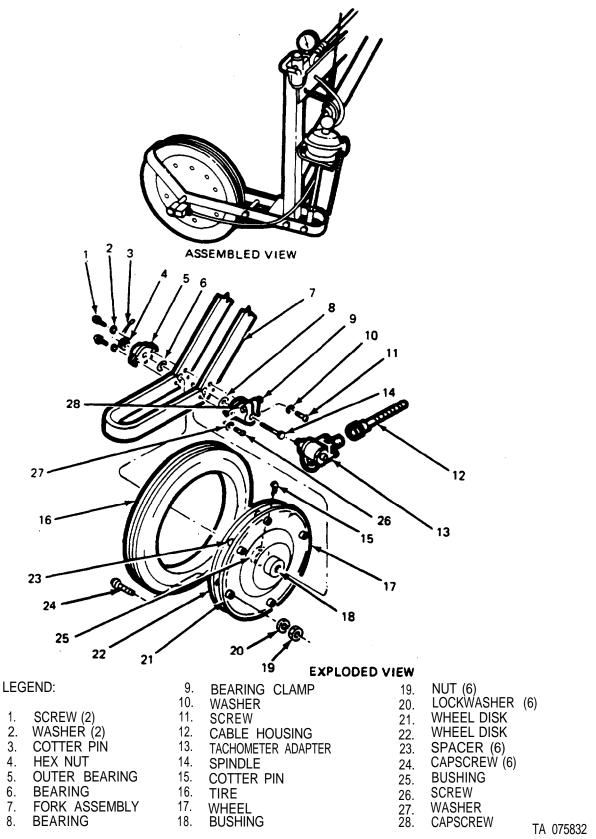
Remove/Install Bitumter Wheel, Tire and Bearing.
